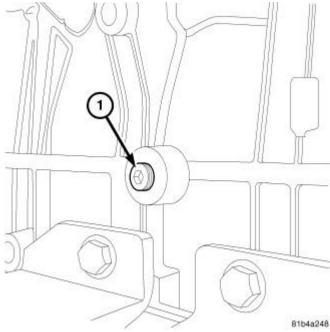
Crank Lock Plug Location Courtesy of CHRYSLER LLC
